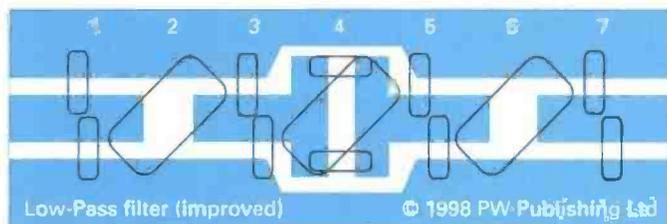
Using a small p.c.b. can make construction of the filter much easier and neater.
